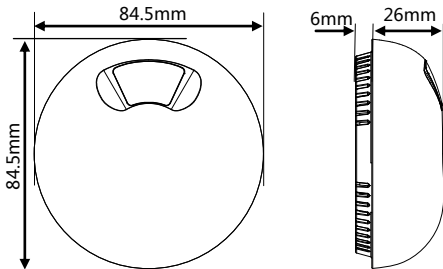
Dimensions - Front View Figure 3. Dimensions - Side View
